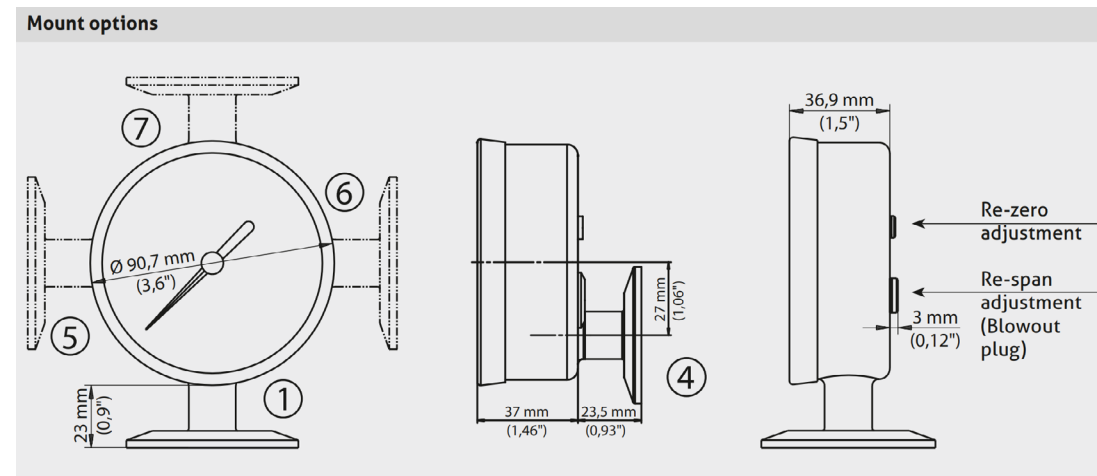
Anderson-Negele EM model pressure gauge mount options and dimensions.
